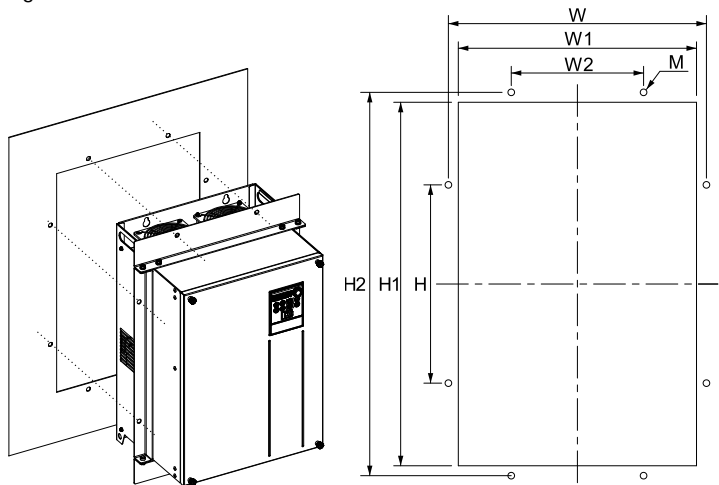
Frame E/F/G Middle Installation Dimension Drawing
